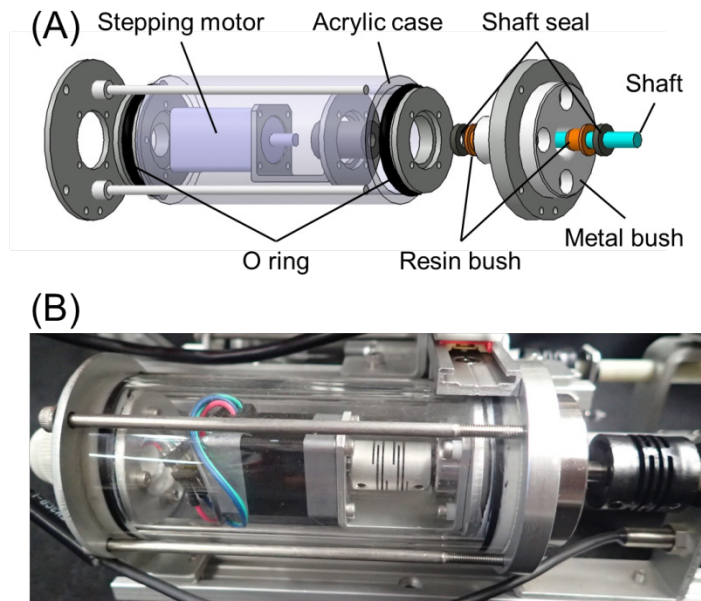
Waterproof motor housing; (A) exploded view of the designed housing, (B) photo of the manufactured housing
